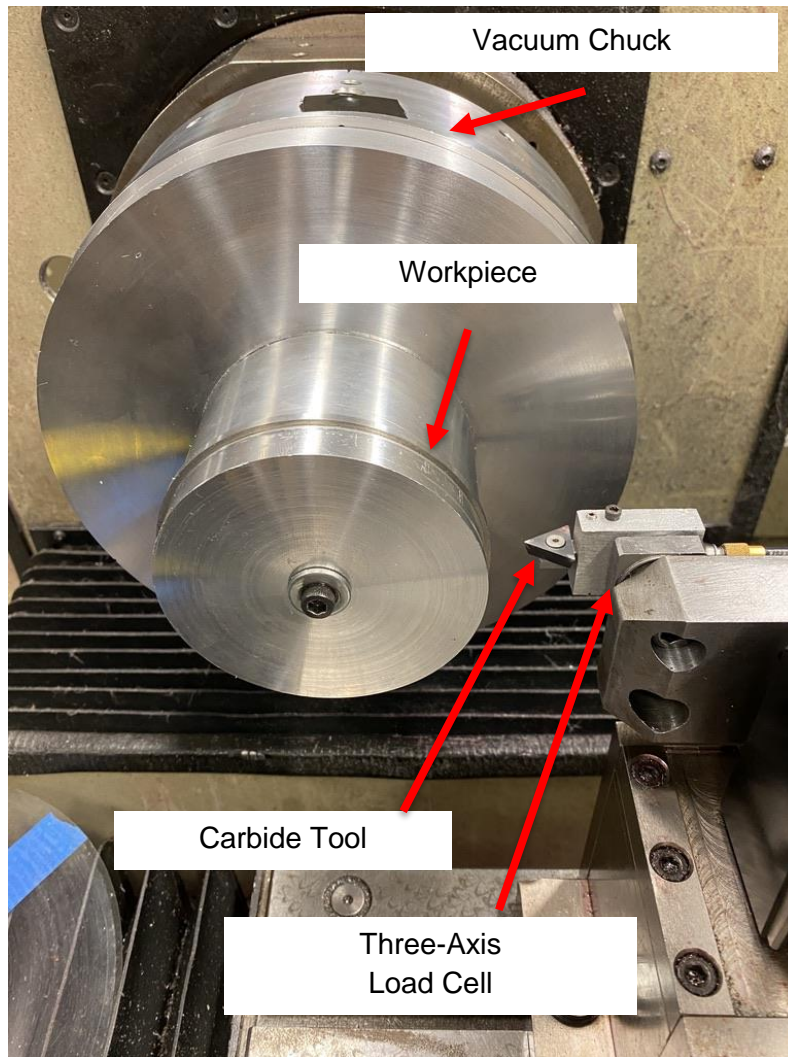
Setup for MQL testing where the aluminum alloy sample is sandwiched in the fixture and cut using carbide insert. Also highlighted are is the vacuum chuck where the fixture is attached, and the three-axis load cell used to measure force.
